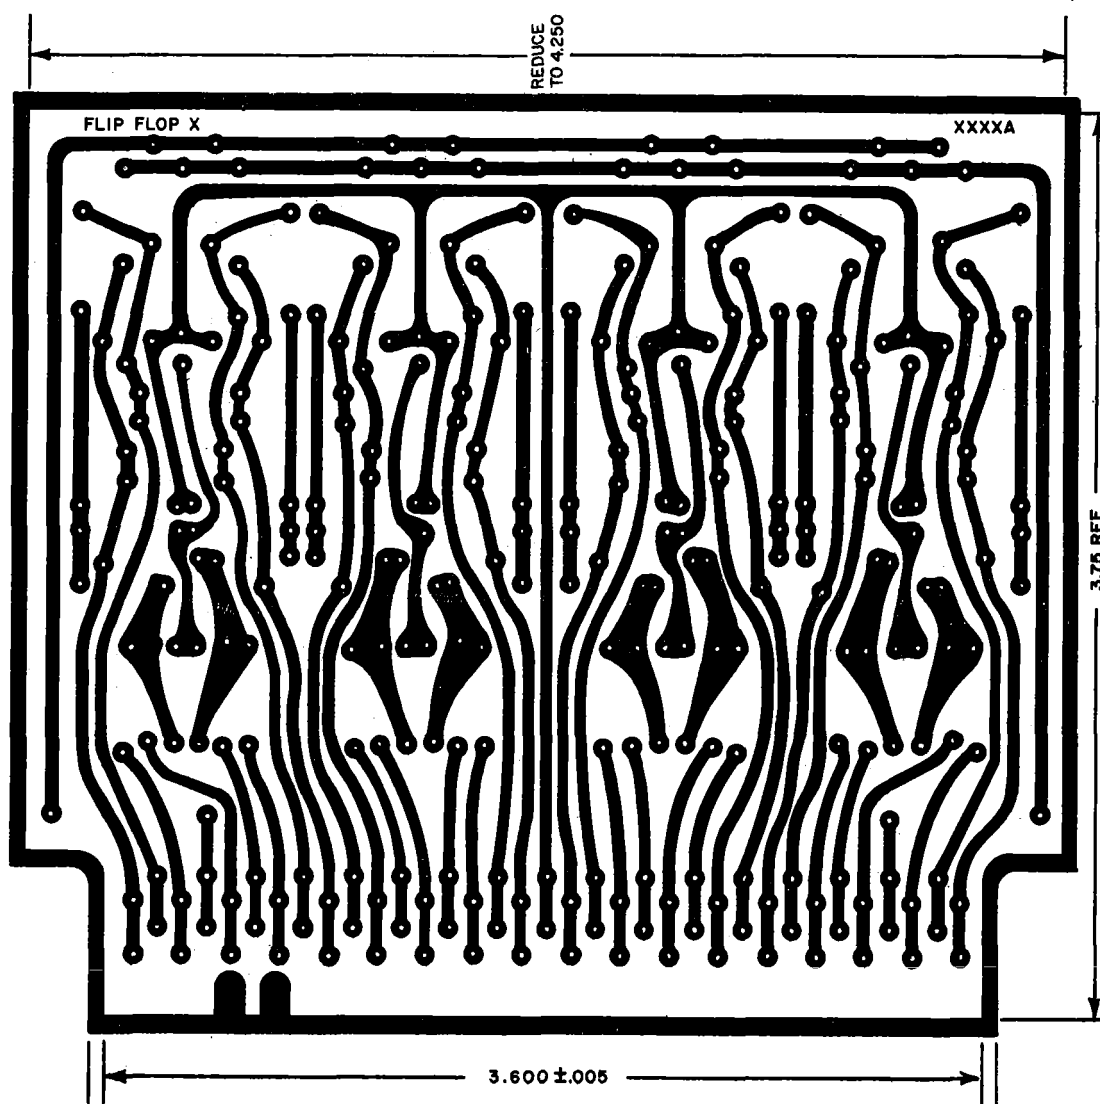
Example of a Printed Wiring Master Drawing
